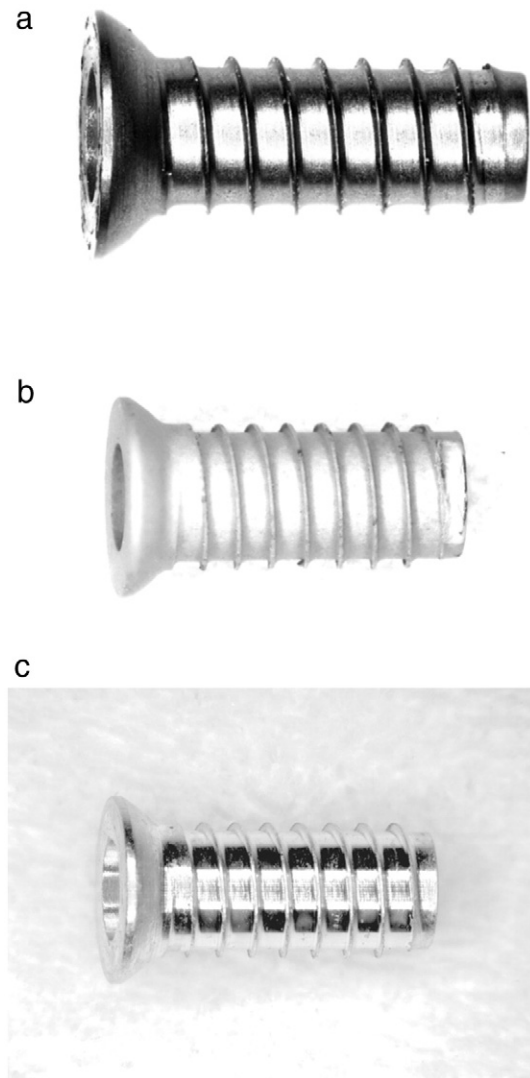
Macroscopic image of the used titanium rivet-screw (a), macroscopic view of a magnesium rivet-screw with plasmaelectrolytic coating (a) and without coating (b).
